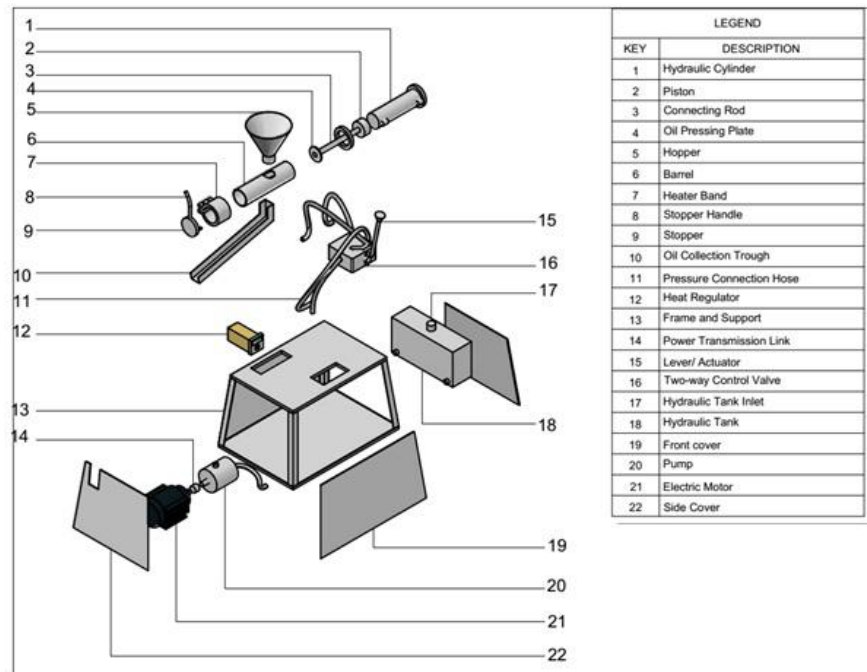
Exploded drawing of the Hydraulic Press for Sesame Oil
